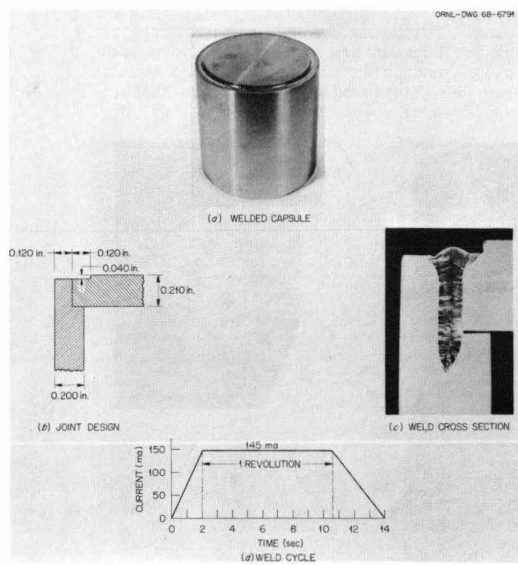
Details for electron-beam welded SNAP-21 capsules showing (a) the welded capsule, (b) the butt-type joint design used, (c) a cross section of a developmental weld with penetration the full 0.170-in. depth of the cap (approx 7x), and (d) the automatically programmed weld cycle used.
